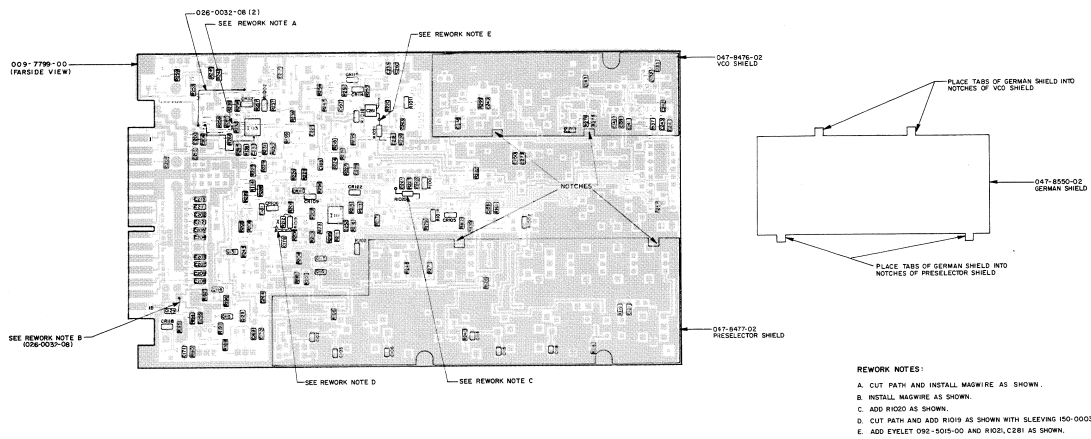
B KY 97A (14V) Main Board Assembly (Sht 2 of 2)
